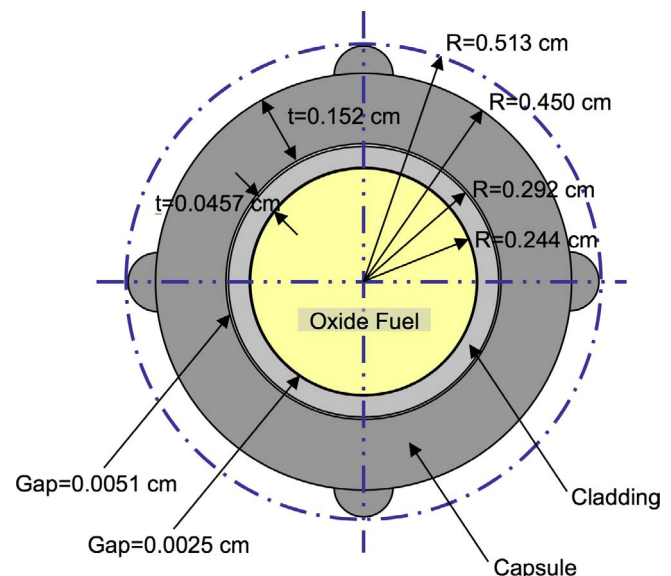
Nominal radial dimensions of fuel rodlet and capsule assembly for oxide fuel experiments in ATR.
